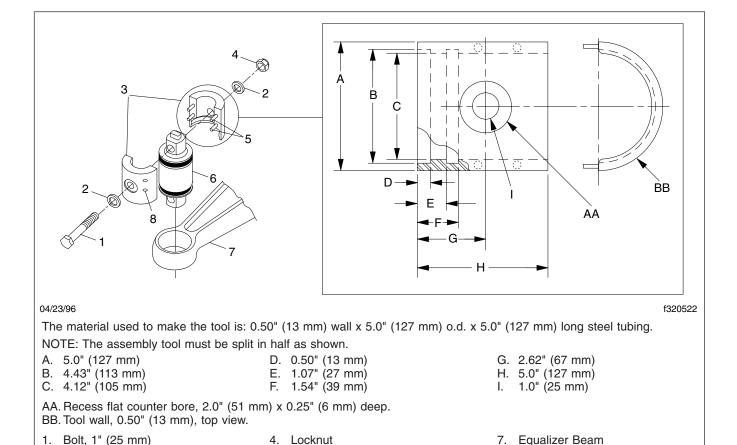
, Assembly Tool (exploded view, with manufacturing information)
